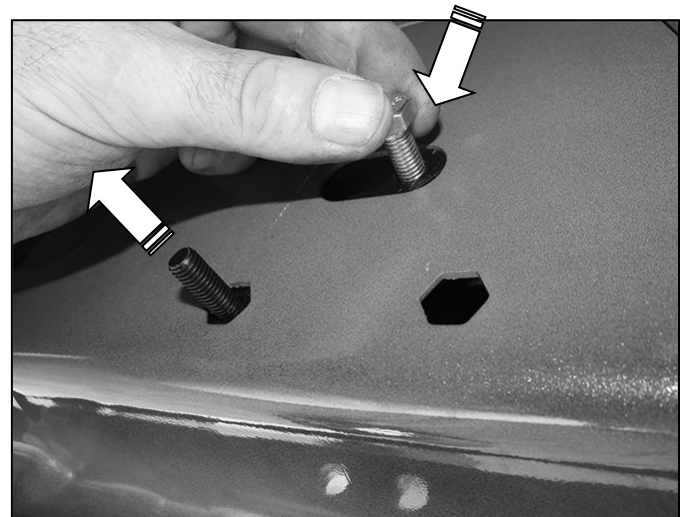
2009-mid 2015 Passenger front mounting location (No factory holes in pinch weld 2009-2012 models)
